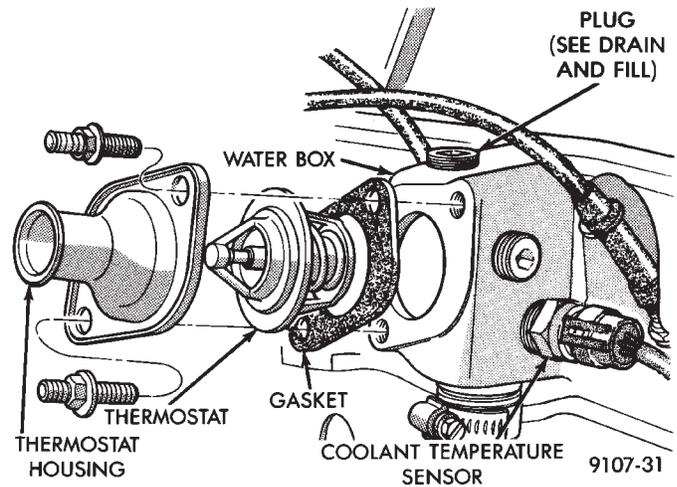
Thermostat, Housing, and Water Box—2.2/2.5L Engine
